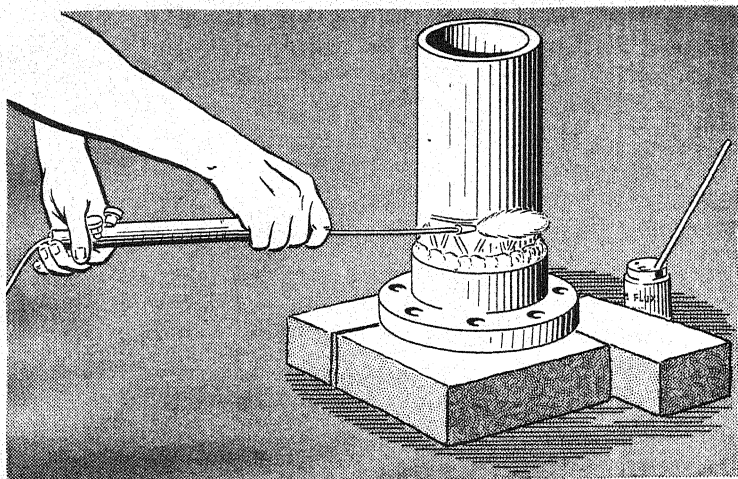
Heating tube to swell it up. Chalk lines indicate path of torch.
